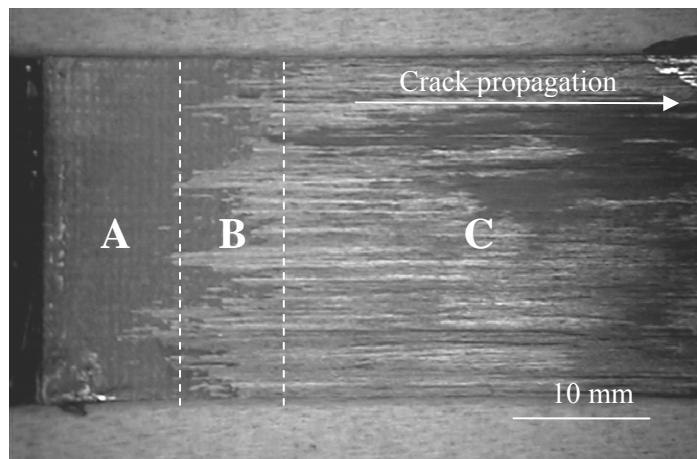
Failure surface of a sample tested in impact-fatigue [IF5 specimen]
